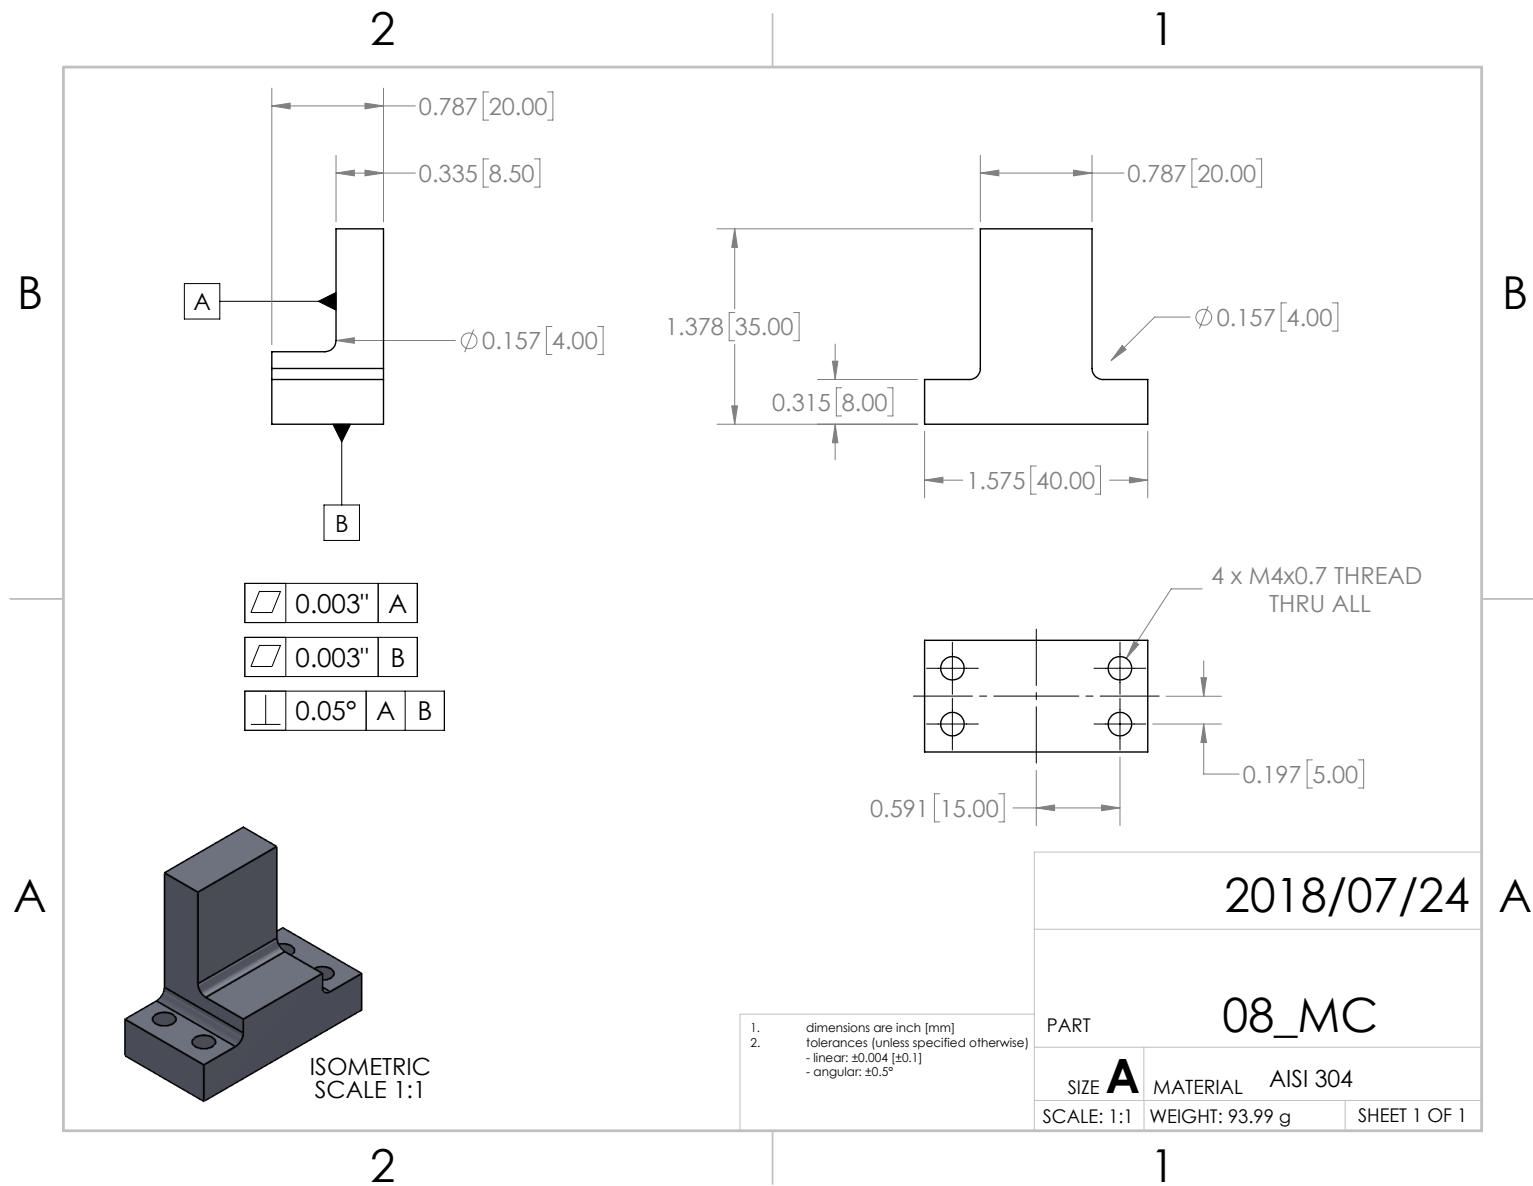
Removable sample fixtures, for gluing samples into the tester.
